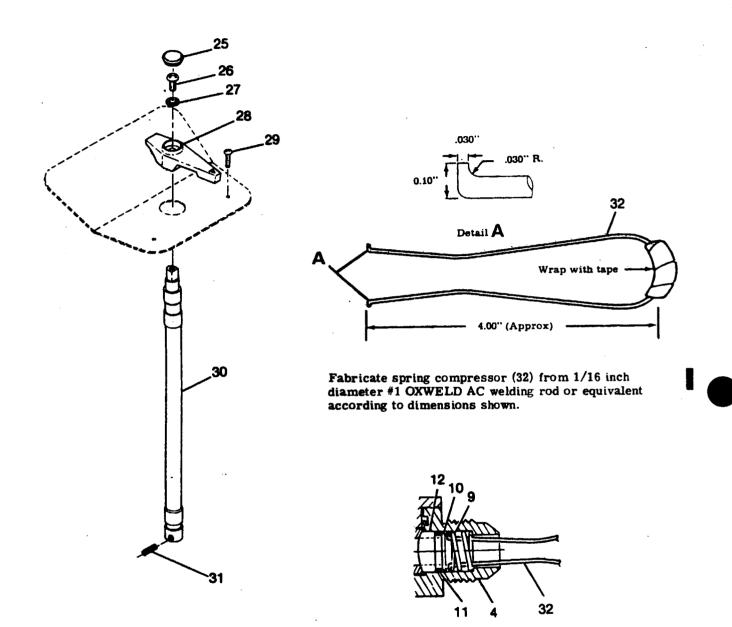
Fuel Selector Valve. (Sheet 2 of 2)
